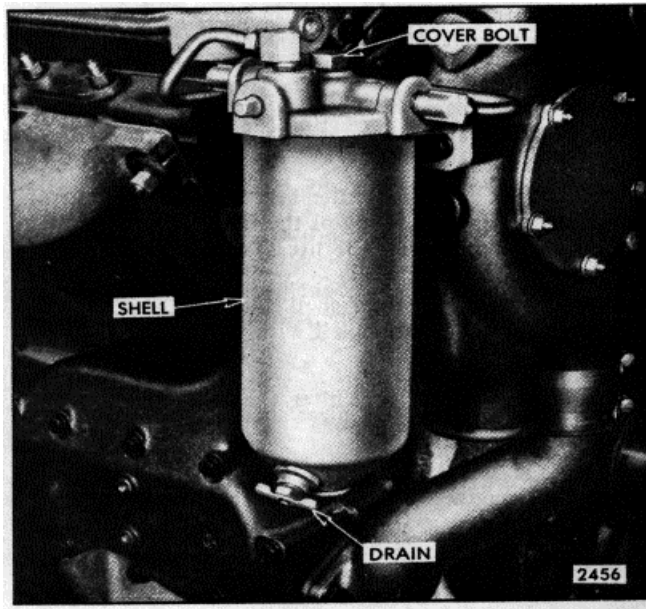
Typical Fuel Filter Mounting (Bolt-On Type)
